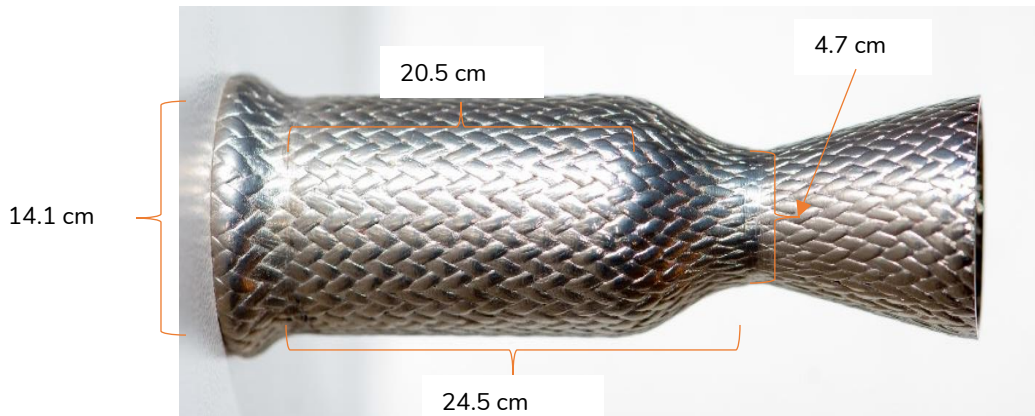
Sample DragonScale Thrust Chamber with Design Dimensions
